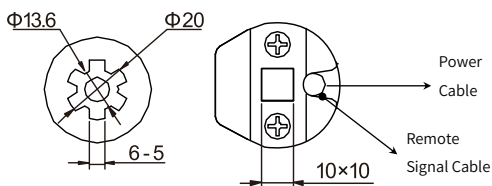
Dimensions—Motor Bottom View (Unit: mm)
